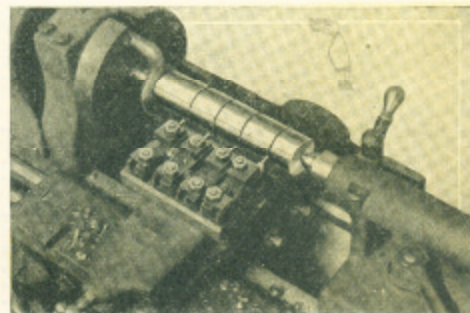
Multiple Tool Block on Lathe Locating Shoulders and Recessing.
